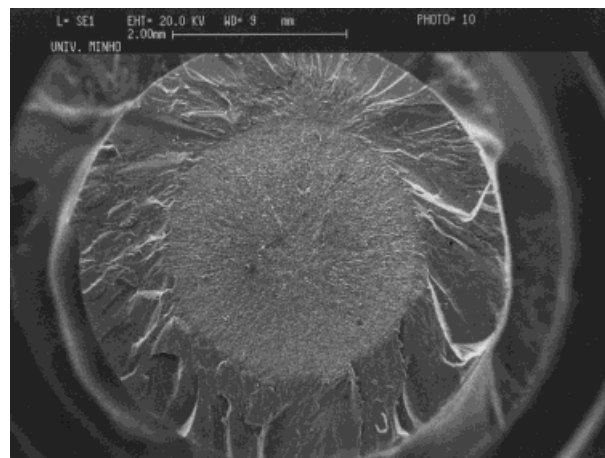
Typical tensile fracture surface of SCG-S moldings.
